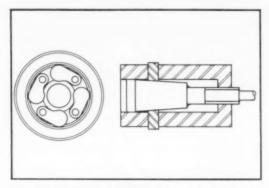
Another type of expanding locator is shown above; the tapered shaft, when drawn back by turning the threaded end, moves four fingers uniformly outward.
